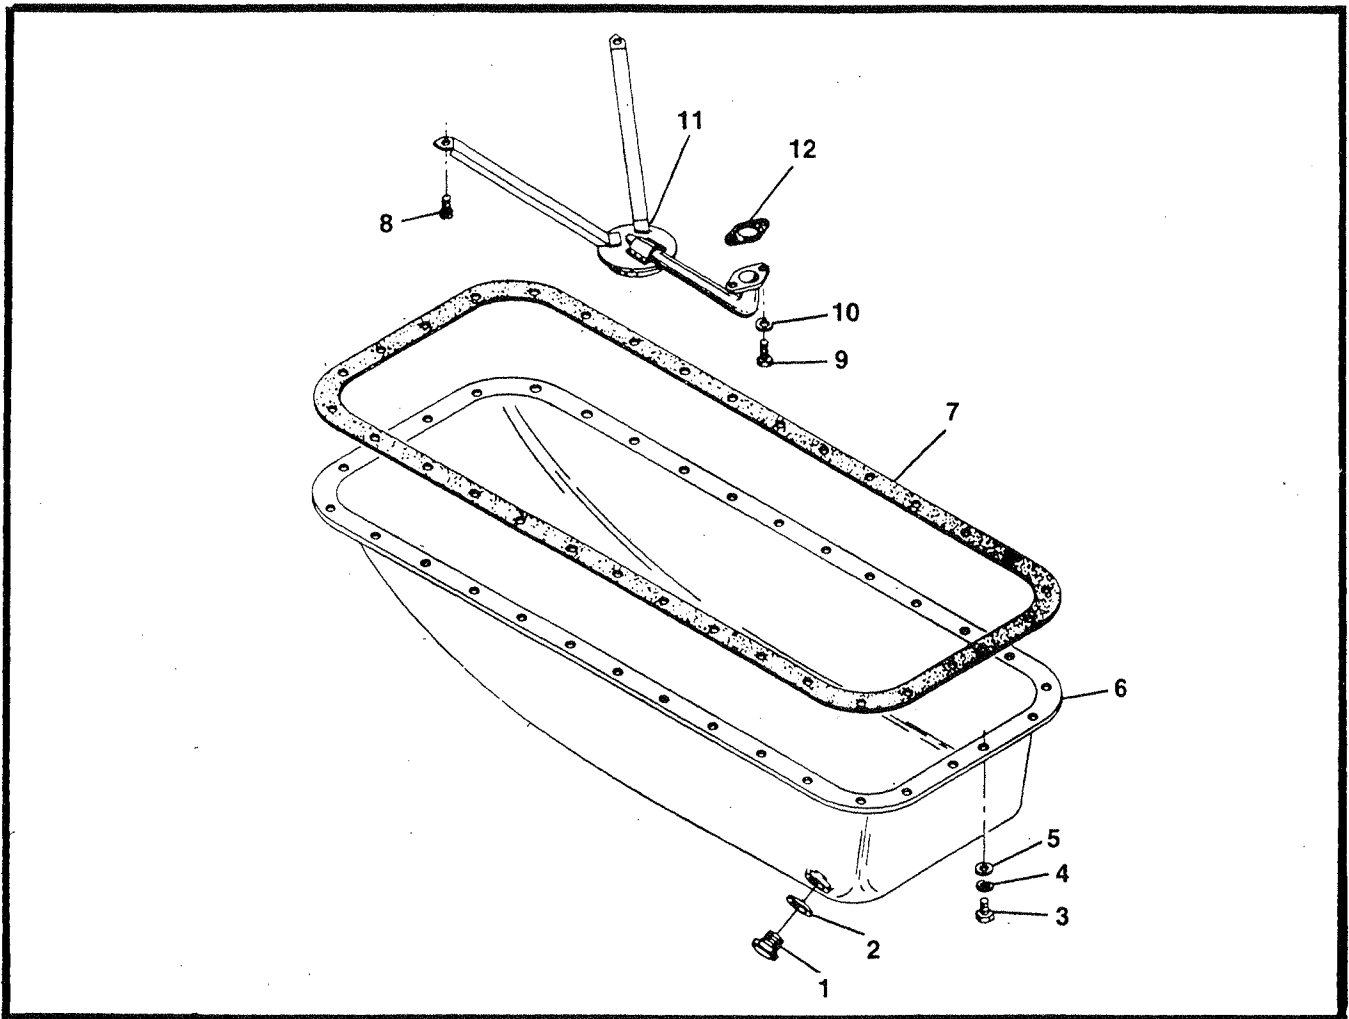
A. OIL SUMP, O-470-A,B,E,J,K,L,M,R,S & U.
